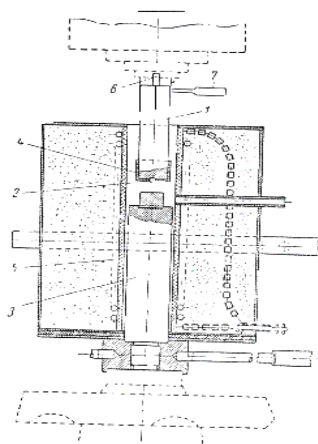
Constructive version of an enclosure that can be adjusted to the Brinell hardness device
